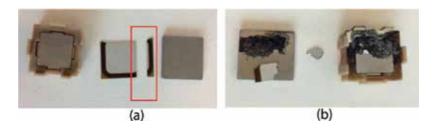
Failed silicon chips caused by nonuniform clamping force [20]: (a) too much pressure and (b) too little pressure.
